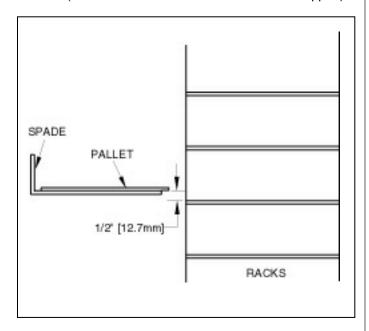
SWITCH LS-35 ADJUSTMENT.
